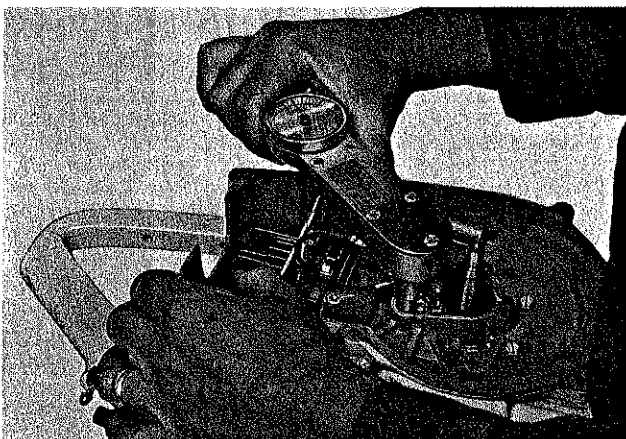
Using a torque wrench to tighten the crankcase cover screws.
